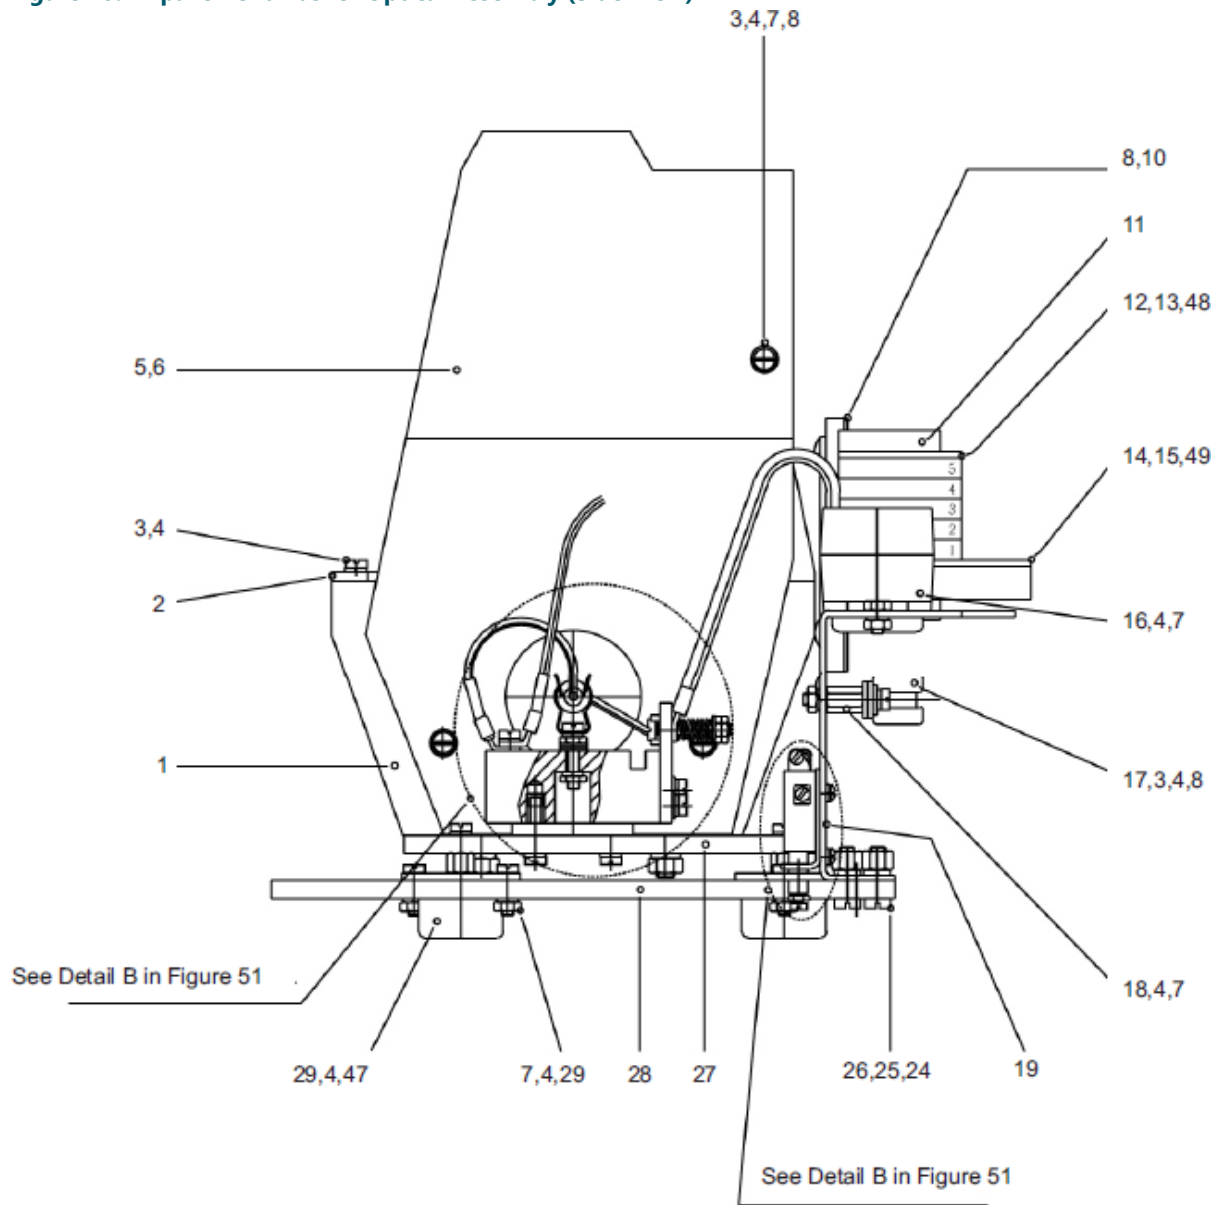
In-pavement Flasher Optical Assembly (Detail A and Detail B)
